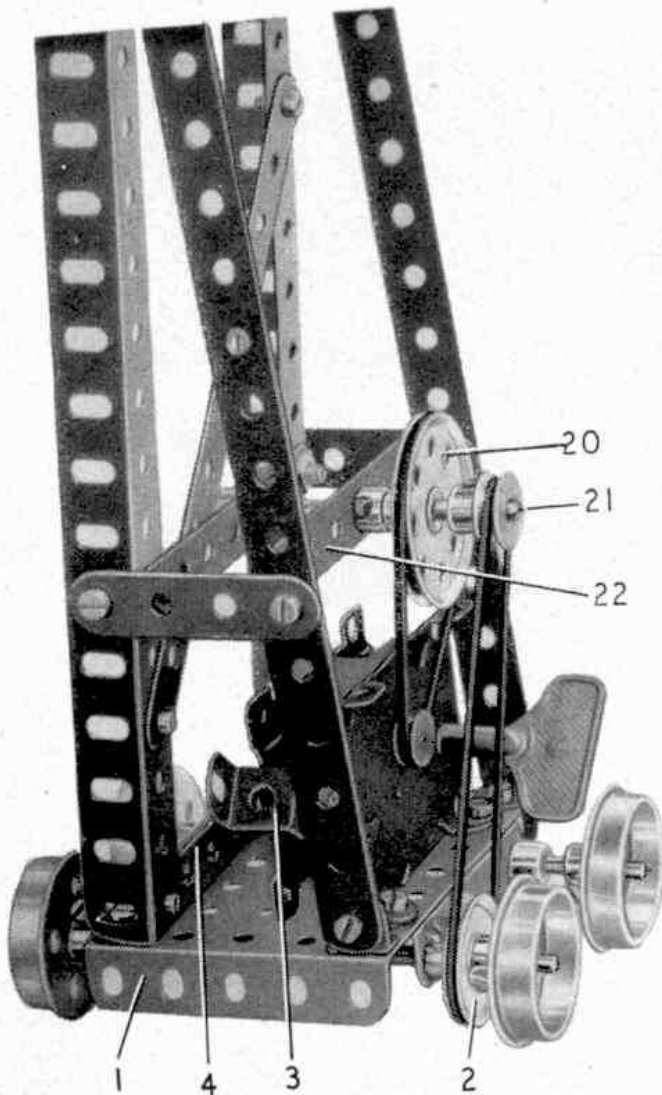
The base of the gantry tower to which the Magic Motor is fitted.
